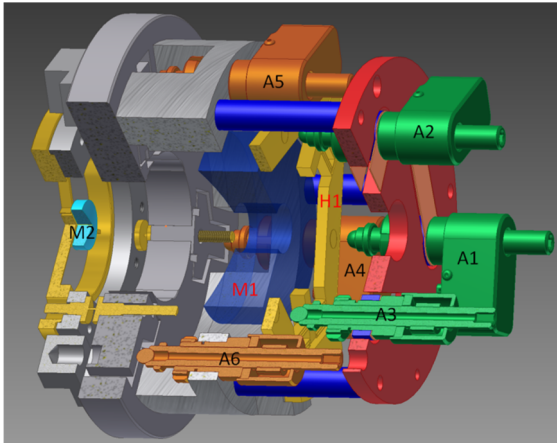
Mechanical drawing of a mirror holder with the substrate bending mechanism.
